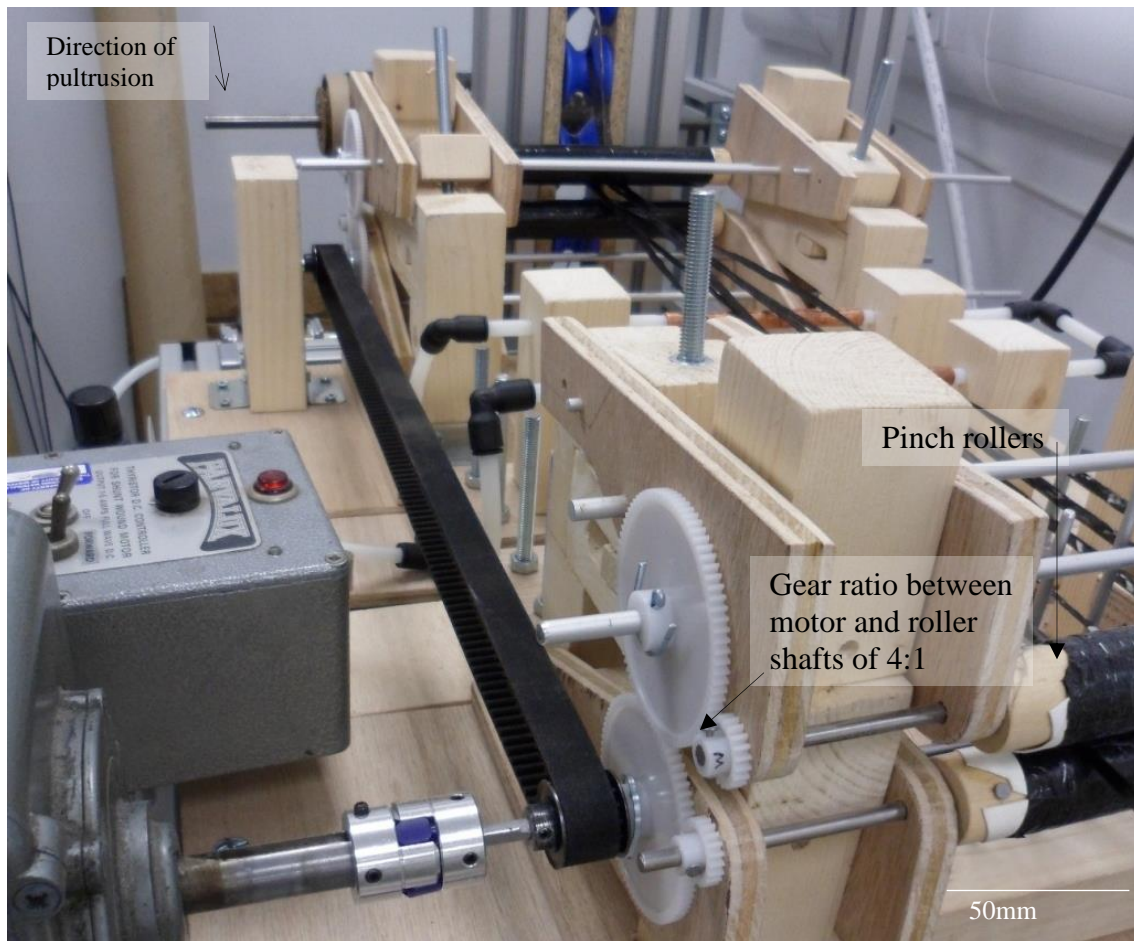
Power transmission between driven shaft and rear pinch rollers.
